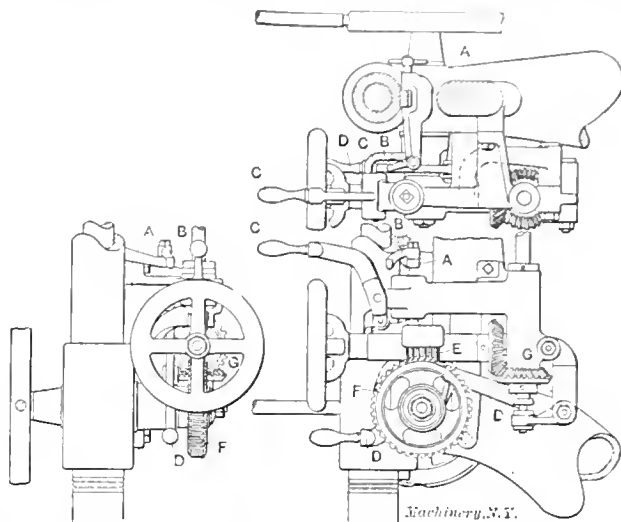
Detail of Feed Mechanism, showing Double Automatic Stop Motion change feed gearing. The counter-shaft at the rear of the machine is driven by a single belt. It is connected with the driving cones of each machine by a friction clutch and bevel gears, giving separate control for each spindle. The use of a single belt drive effects a considerable saving in belting over the usual method of having individual counter-shafts. Each of the main shaft bearings may be adjusted without taking the counter-shaft apart. This drive is proportioned to give the same capacity as the makers' regular 34-inch drill. When desired, however, special three-step cone pulleys will be provided, which will carry a 4¾-inch belt. With this provision the machine will drive a 21½-inch drill in solid steel.
